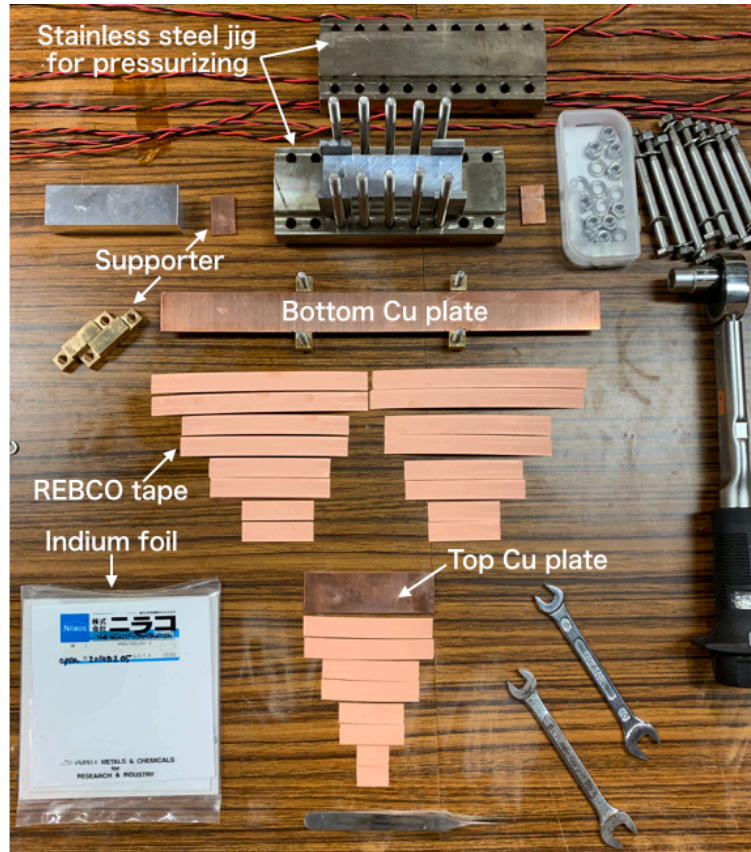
Materials and tools for fabricating one two-row-four-layer joint sample
